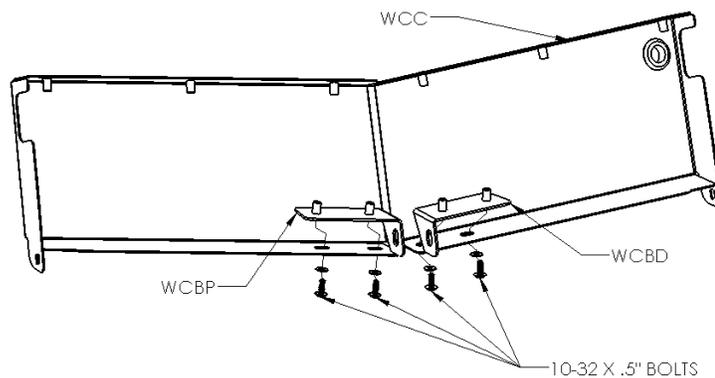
Center Wire Cover, Wire Cover Bracket installation, shown from front view
